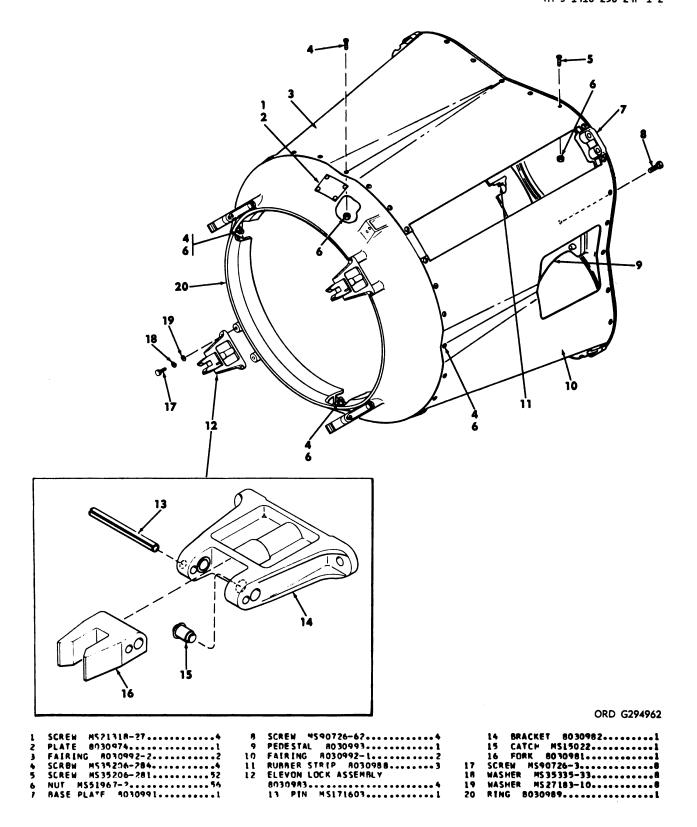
FITTING ASSEMBLY, THRUST, BOOSTER /8030994/ /SEF FIGURE 168 FOR NEXT HIGHER ASSEMBLY/
